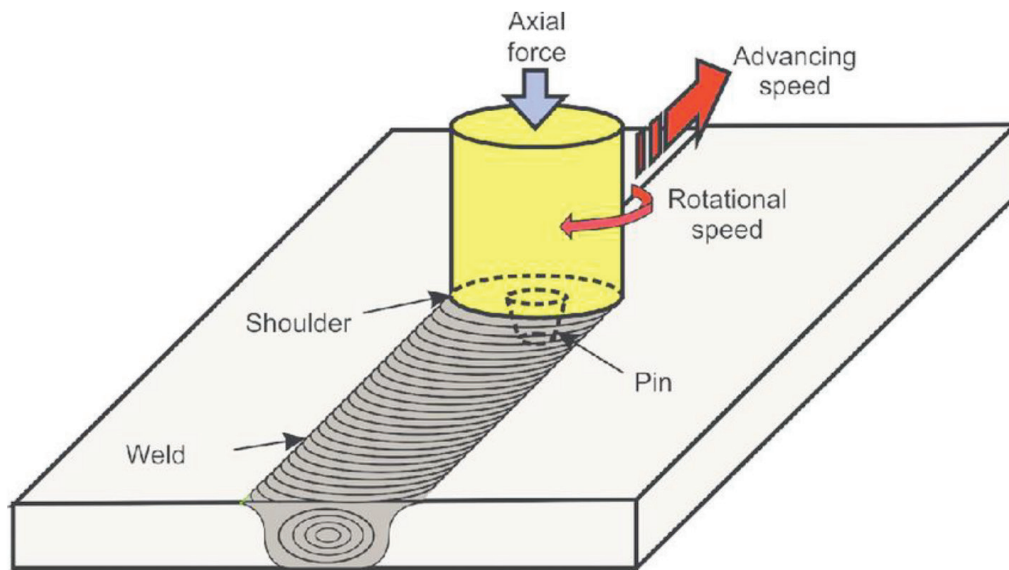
A diagram of the friction stir welding technique [31].
